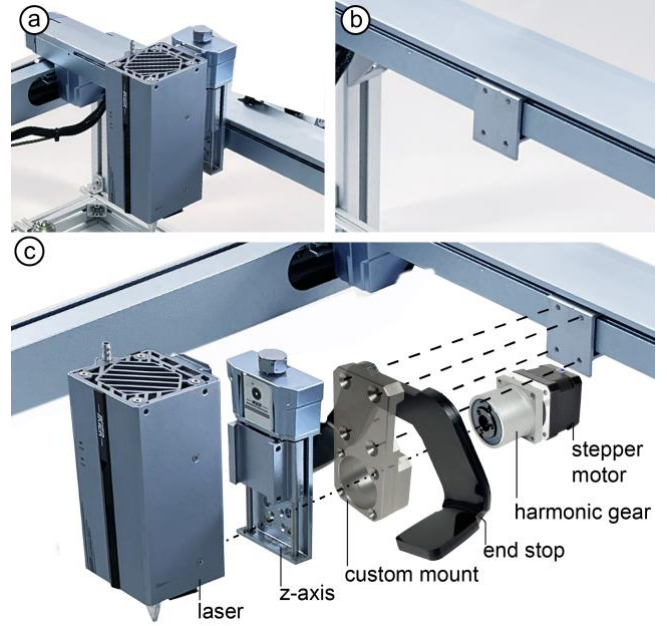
We added head tilt to an off-the-shelf laser cutter by (a) removing the laser head and z-axis from the gantry, then (b) using the exposed mount (c) to insert a stepper motor and a gearbox, held together by a custom mount.
